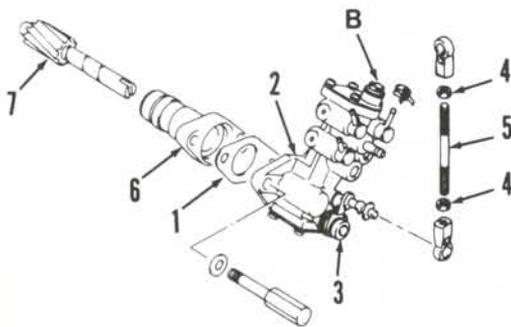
Exploded view of oil injection pump assembly.
